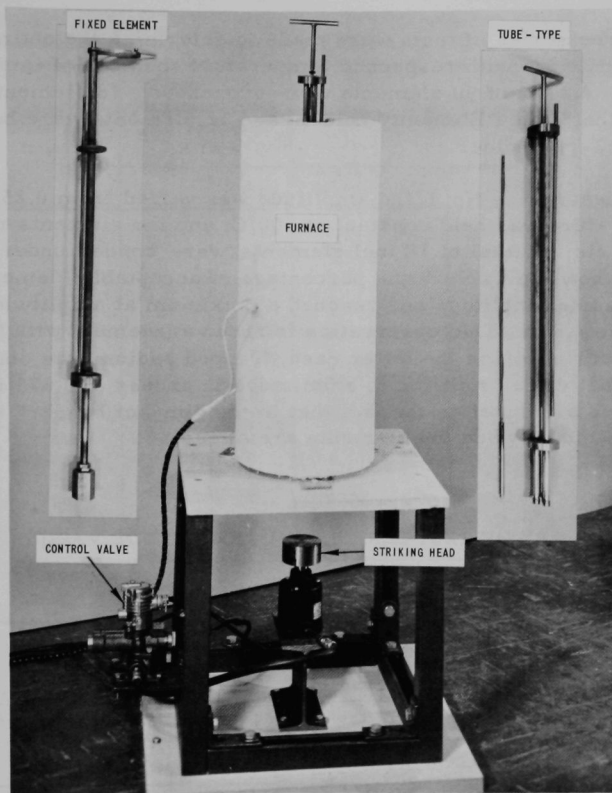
Timed-impact Bonder and Fuel-element Holders
